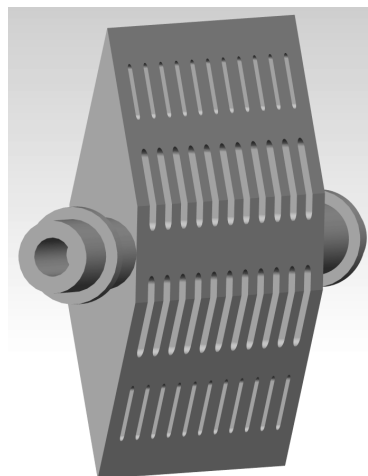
Side view of the final geometry for the lateral ultrasonic vibration assisted cutting knife.
